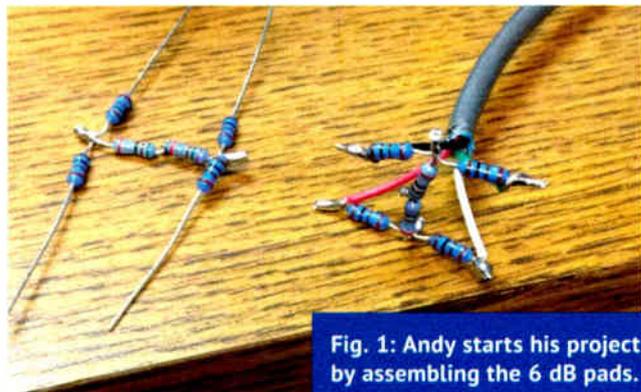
Andy starts his project by assembling the 6 dB pads.
